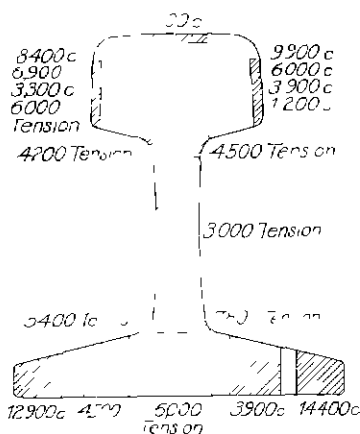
Cross section of new 100 pound rail. Internal stresses after cold rolling with an blast
